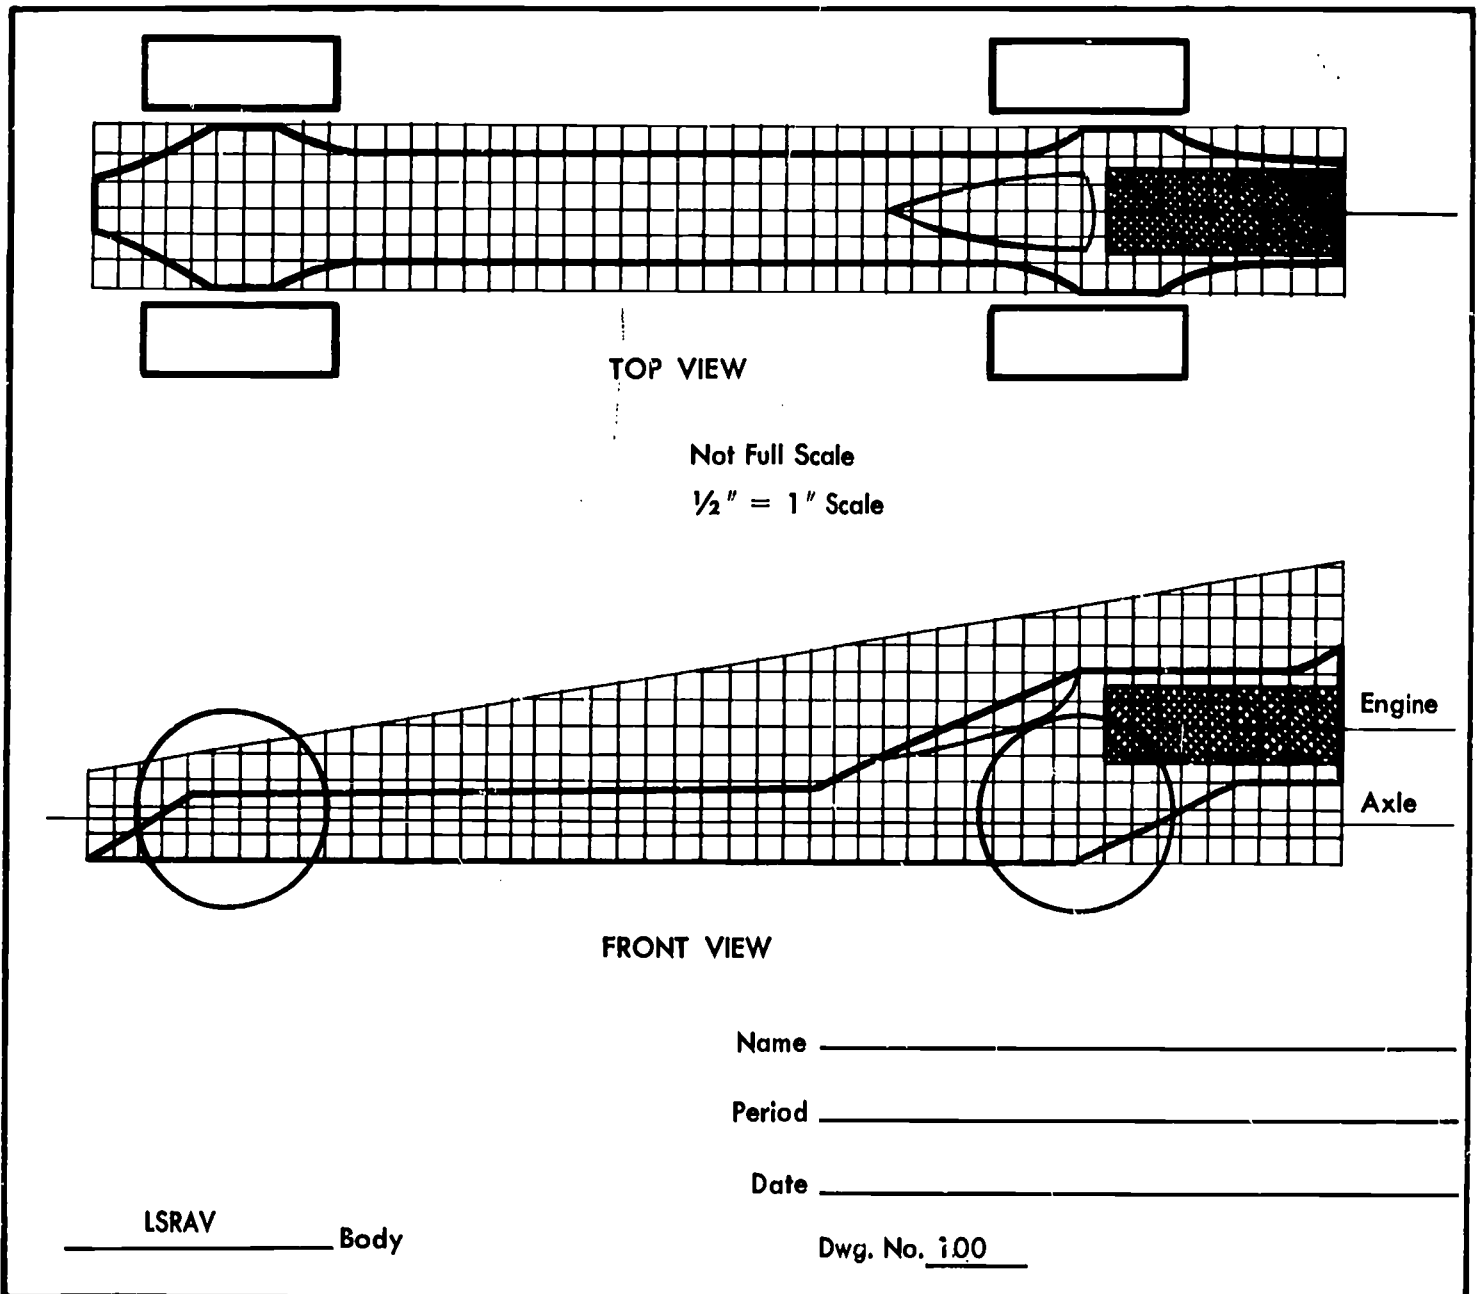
A-1. Front and Top Views of LSRAV (Example only)
